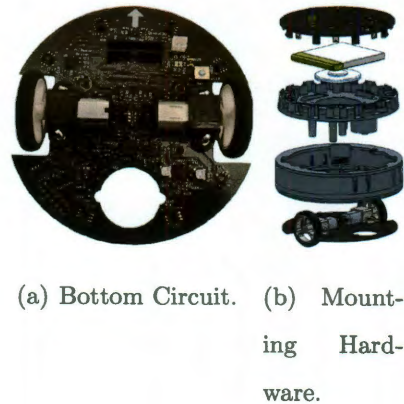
a: The bottom circuit board with eight bump sensors and integrated motor encoder units. b: Mounting hardware has three sections. The shield, support and skirt.
